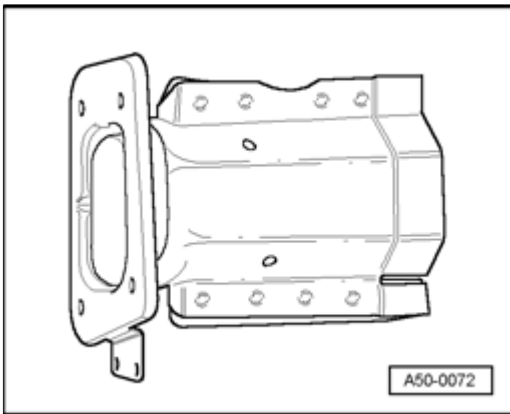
Front Longitudinal Member, Partial Replacement - Replacement Part
